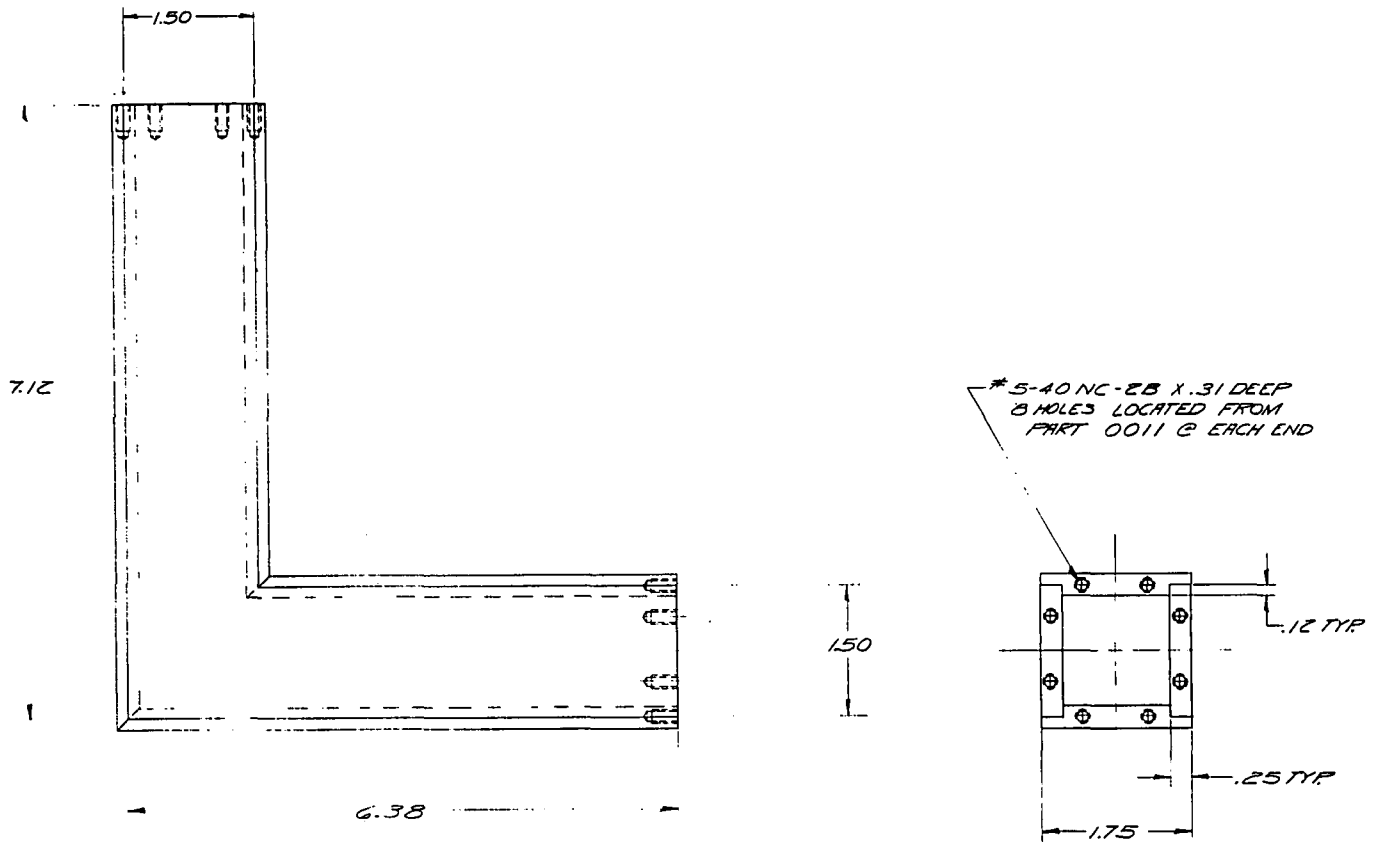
B. 90-DEGREE, 0-INCH RADIUS MANIFOLD TEST SECTION
